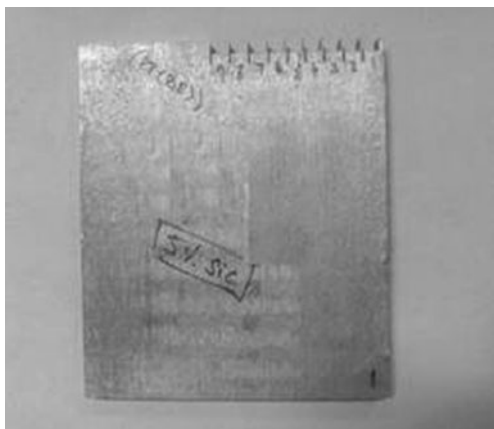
Photograph of machined workpiece of Al6063 with 5% SiC as per L₉ OAFig. 6 Photograph of typical machined part of Al6063 with 5% SiC
